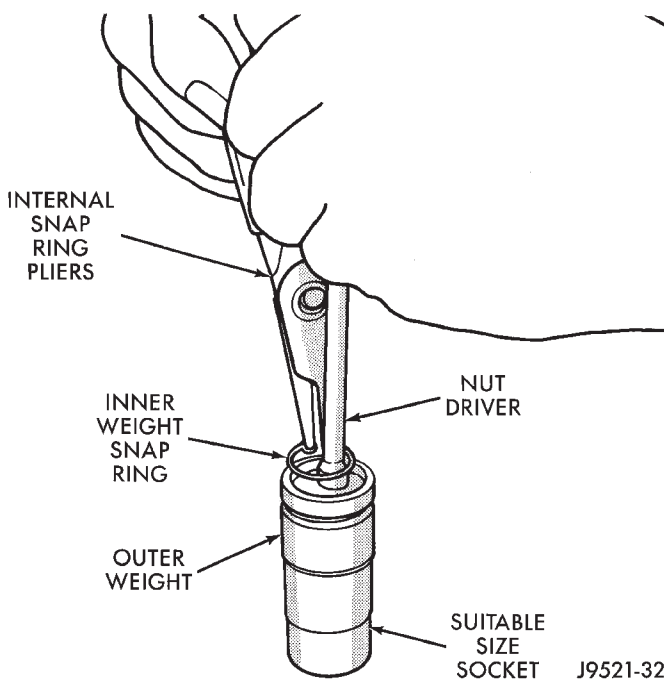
Two-Stage Inner Weight Snap Ring Removal/Installation
